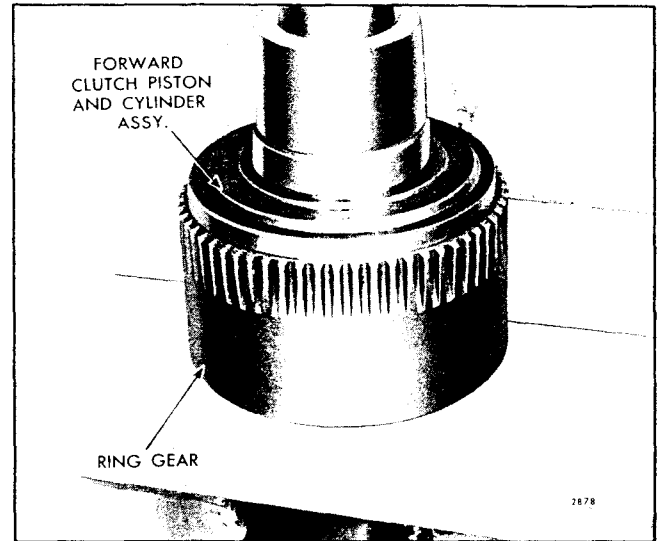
Installing Forward Clutch Piston and Cylinder Assembly in Ring Gear
